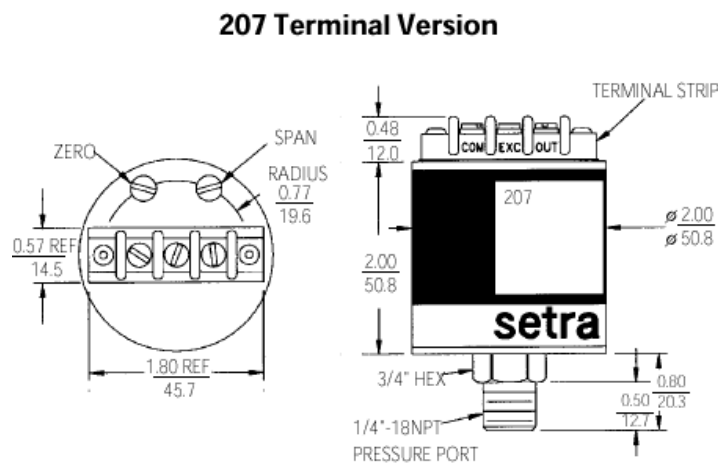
Drawing of Setra C207 Pressure Transducer, with Dimensions in inches, taken from www.setra.com/tra/pro/pdf/206_207.pdf
